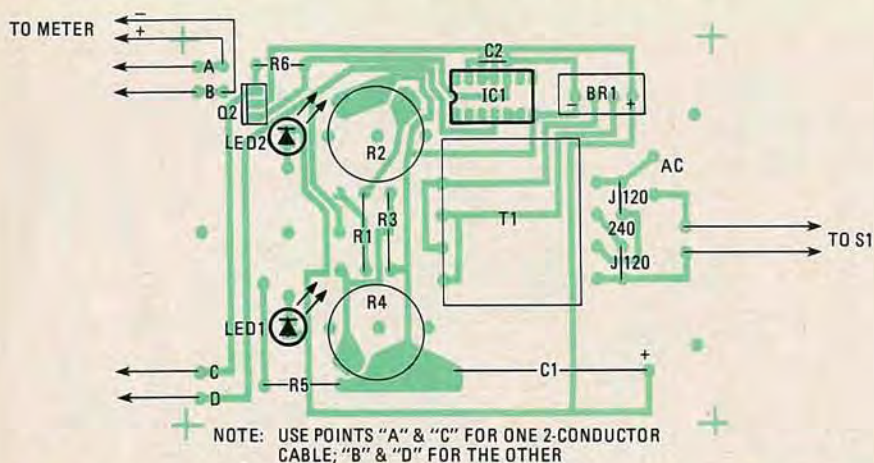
COMPONENT PLACEMENT guide for the PC board. Switches S1 and S2 are front-panel mounted and the LED's are soldered to the foil side of the board.
